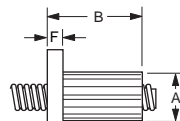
External shaft mechanical specifications - dimensions in inches (mm)
